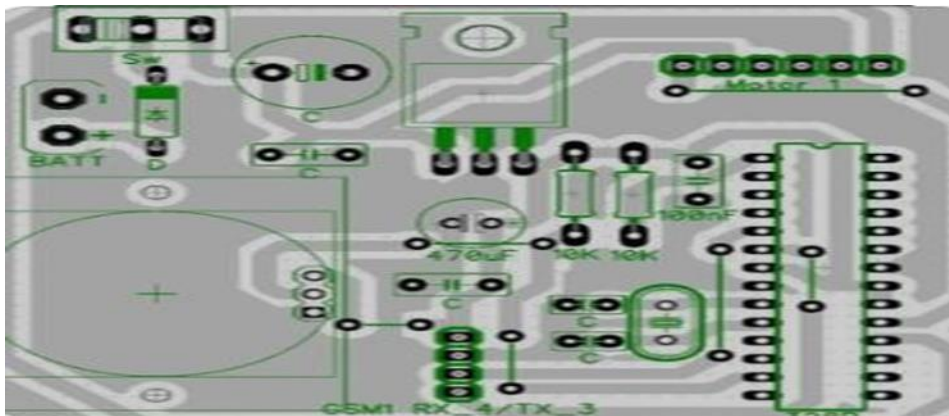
A components layout on printed circuit board (Smith j., 2021)
